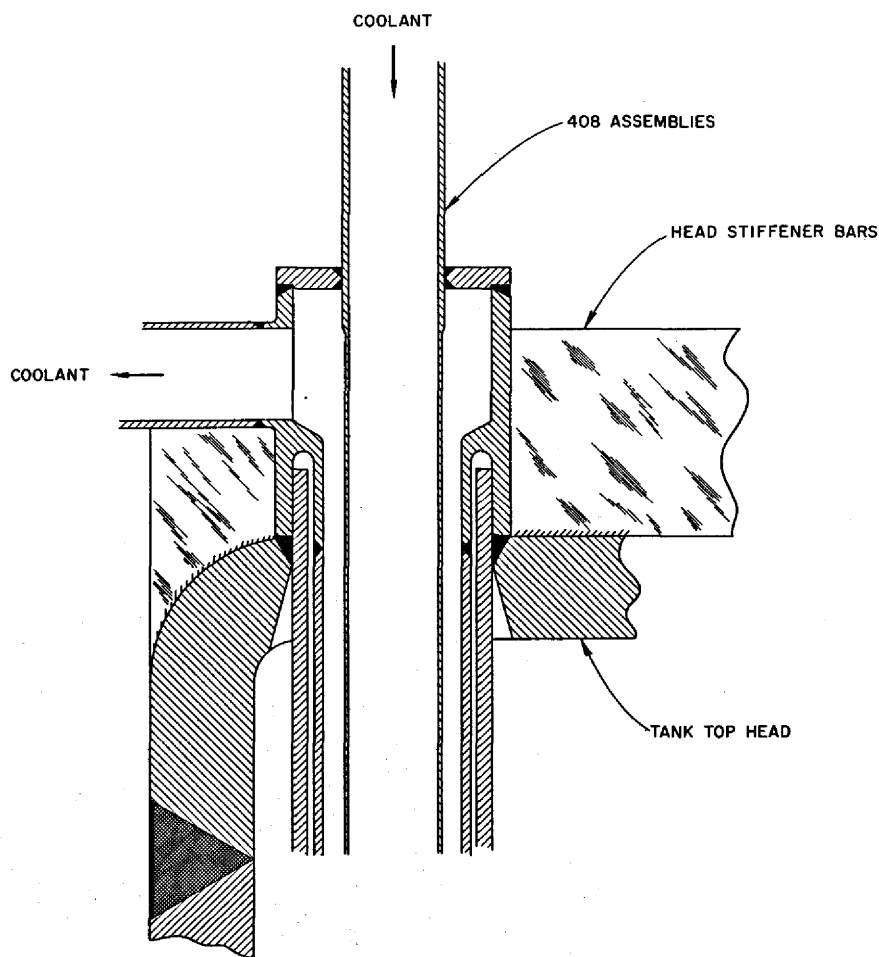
Detail of Thimble Penetration of Drain Tank Head.
